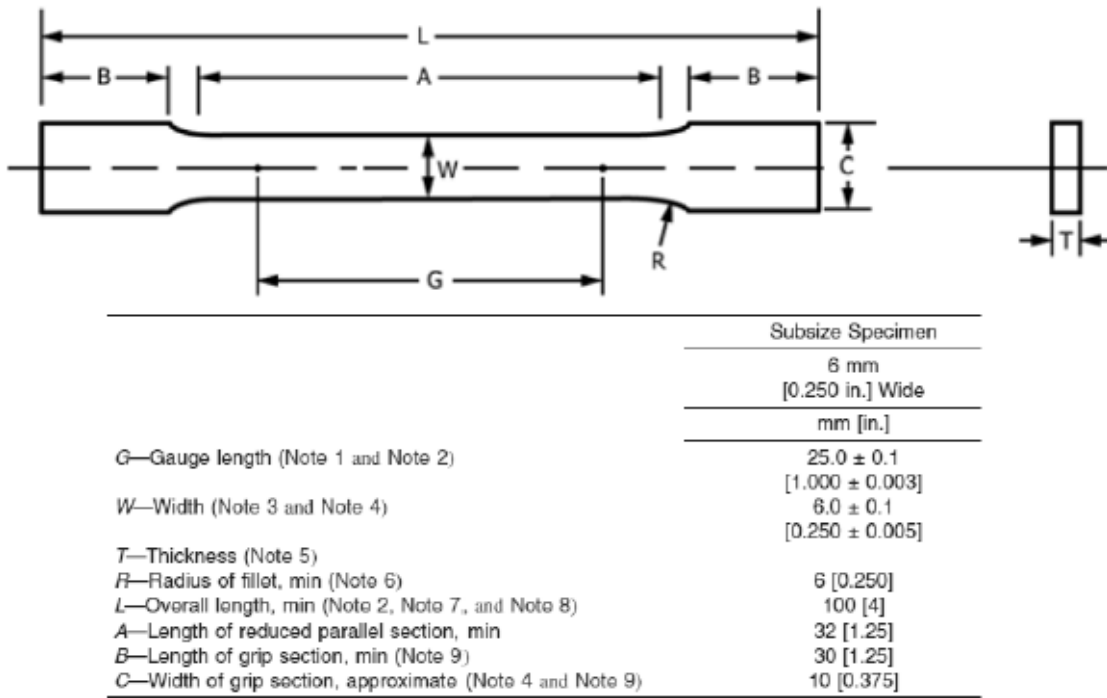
ASTM E8 Subsize Tensile Testing Standard [55]
